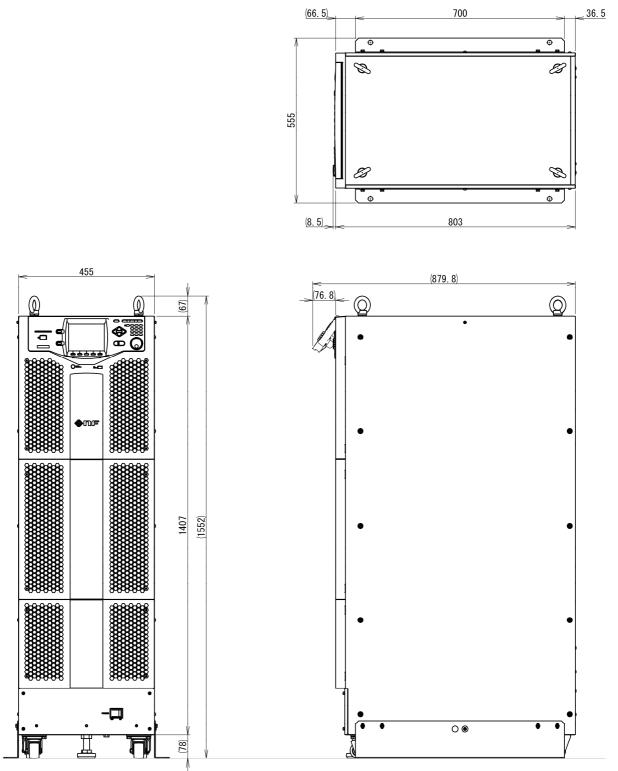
DP160LS Outline Dimensional Drawing (Type 4L cabinet)
